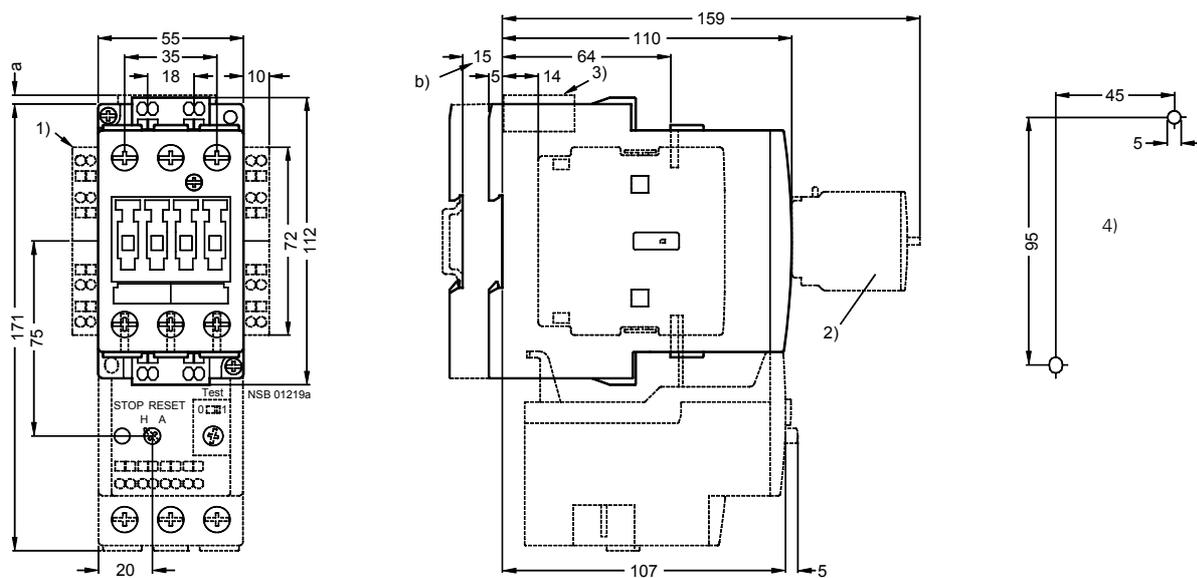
3RT10 3 contactors (Cage Clamp-connection) with surge suppressor, auxiliary contact block and installed overload relay
